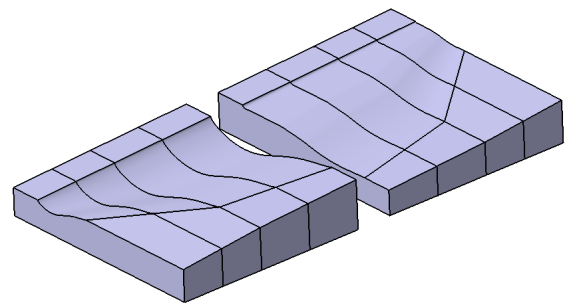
Mould Design for Subscale Main Wing Manufacturing
